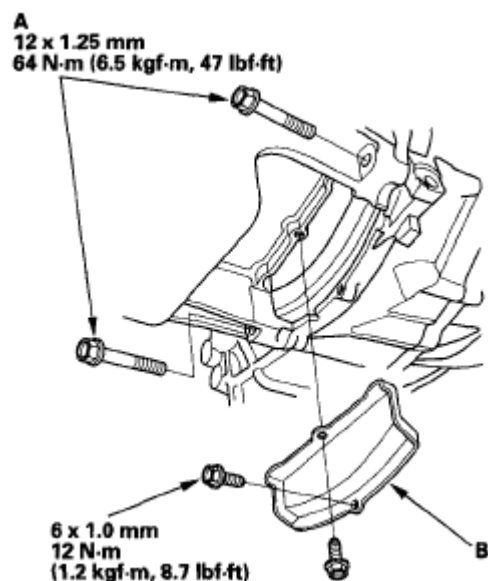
Identifying Transmission Mounting Bolts And Clutch Cover
